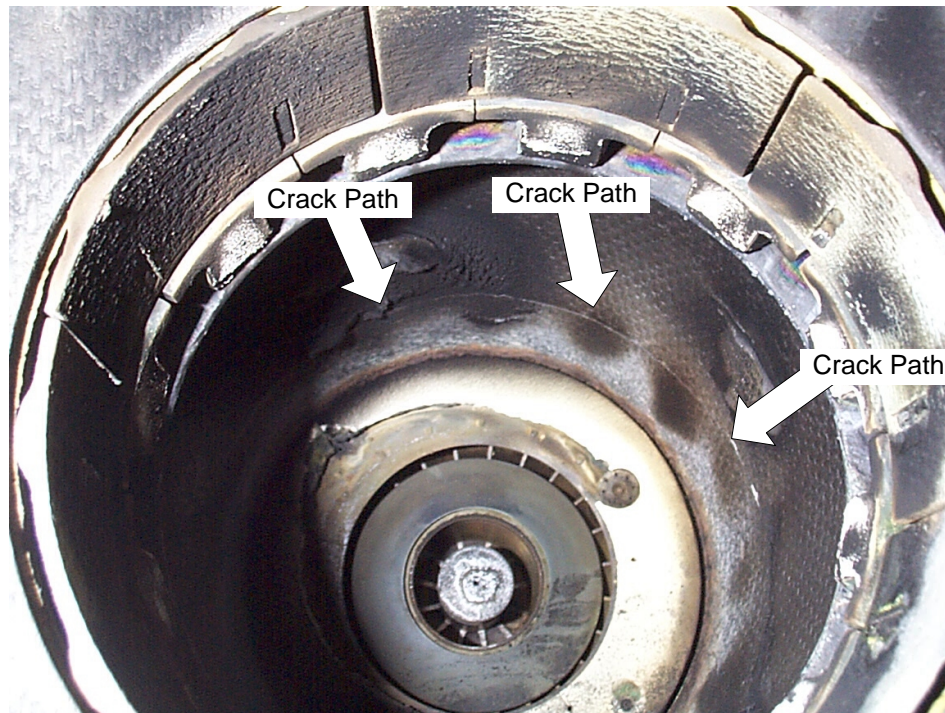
Second Primary-Zone Liner Failure (Parking Lot Side)
